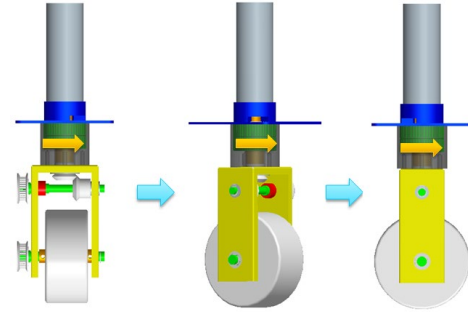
For the third-generation wheel module design, when the one-way bearing is disengaged, the wheel module turns.
